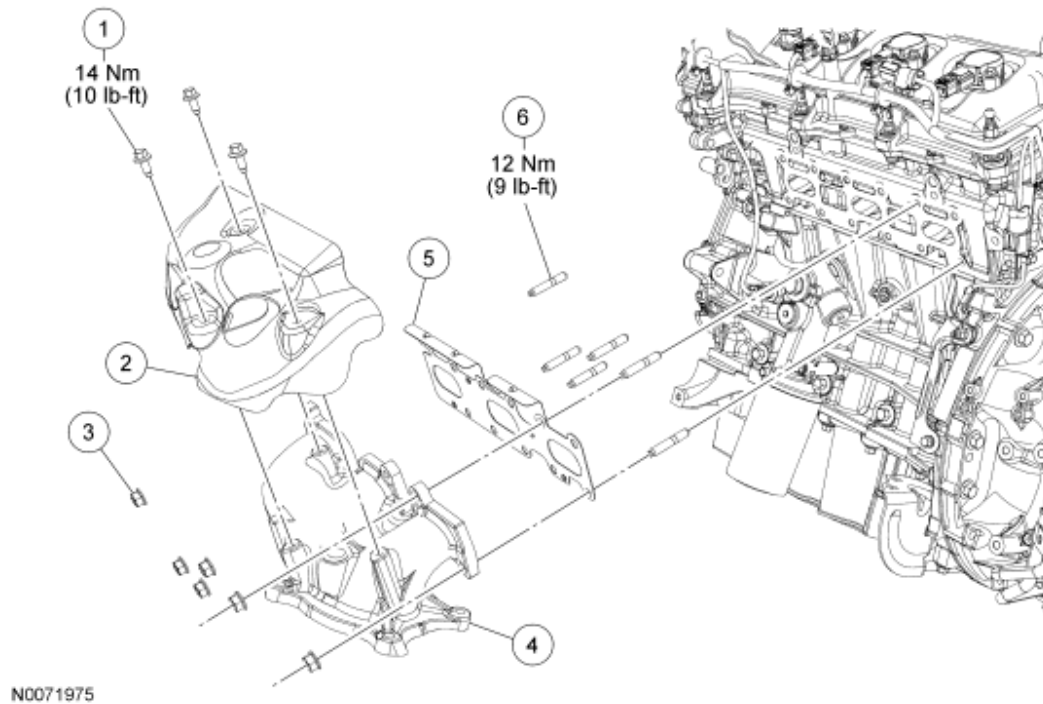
Exploded View Of Exhaust Manifold With Torque Specifications - LH
